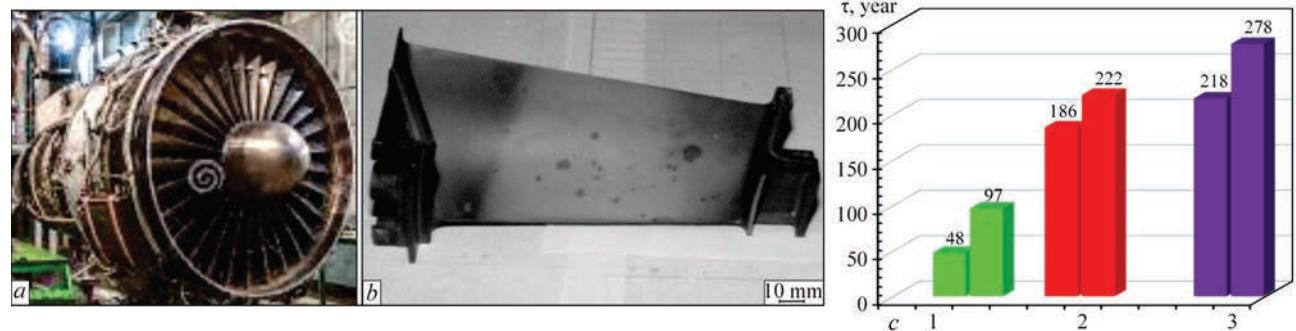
Gas-turbine engine (a), blade (b), long-term strength of butt similar brazed joints Ni₃Al+Ni₃Al produced using multicomponent nickel brazing filler metal without heat treatment (1), with heat treatment (2) and dissimilar joints Ni₃Al+ZhS6U with heat treatment
